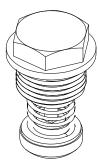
Valve Assembly (NOTE: There are two different valve plug designs)
